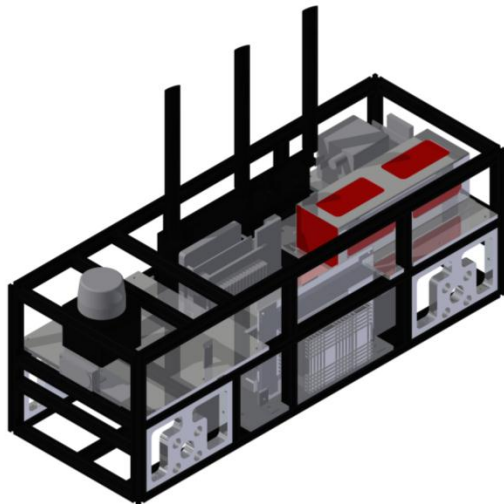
Final Chassis Design with Internal Components - Rendered CAD Image
